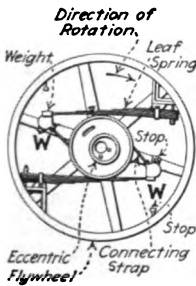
“Hard-wick” shaft governor as used on the Erie engine.
